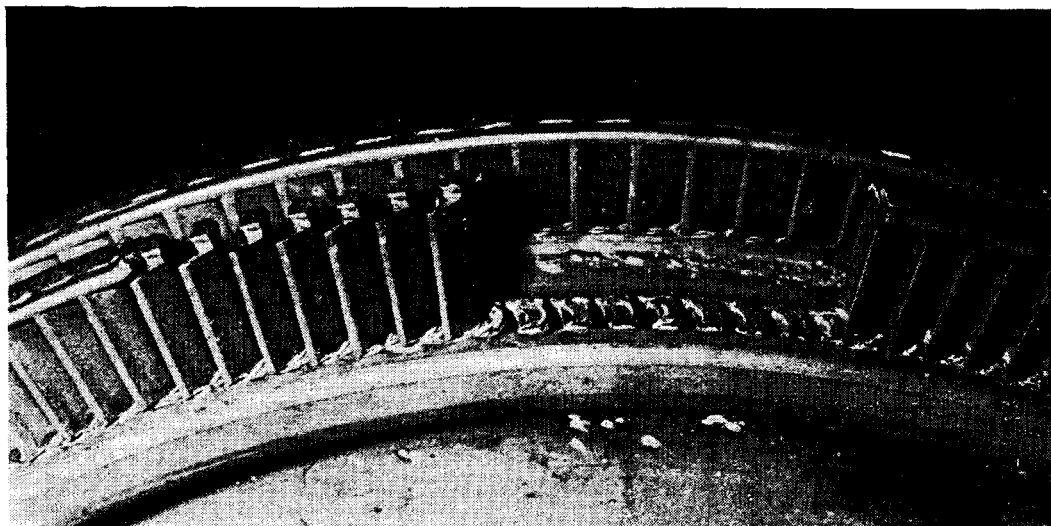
TWL 35 FEED PUMP TURBINE ROTOR SHOWING MISSING BLADES
